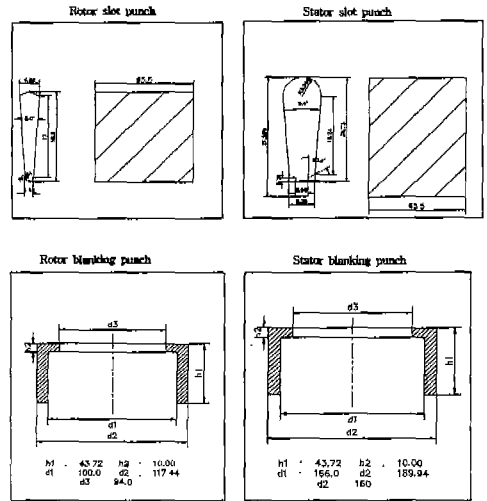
Part drawings for a upper Die of stator and rotor: a) punch
